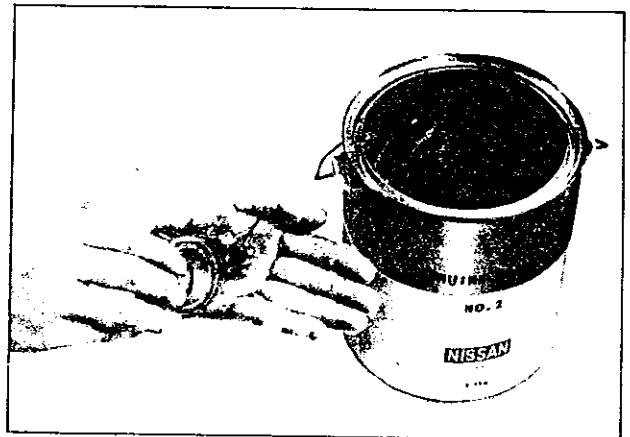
Filling spaces between wheel bearing rollers with grease
